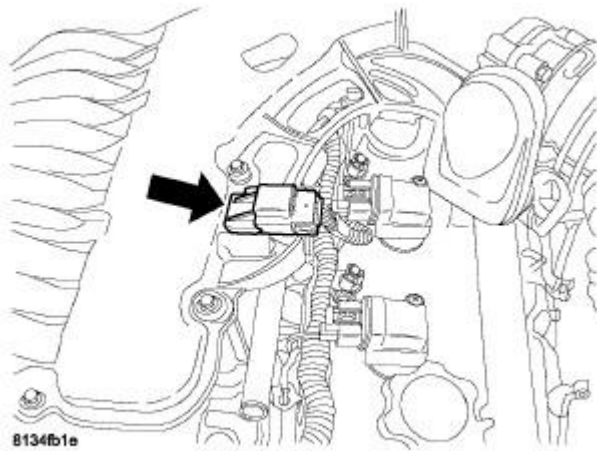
Locating Manifold Air Pressure (MAP) Sensor
